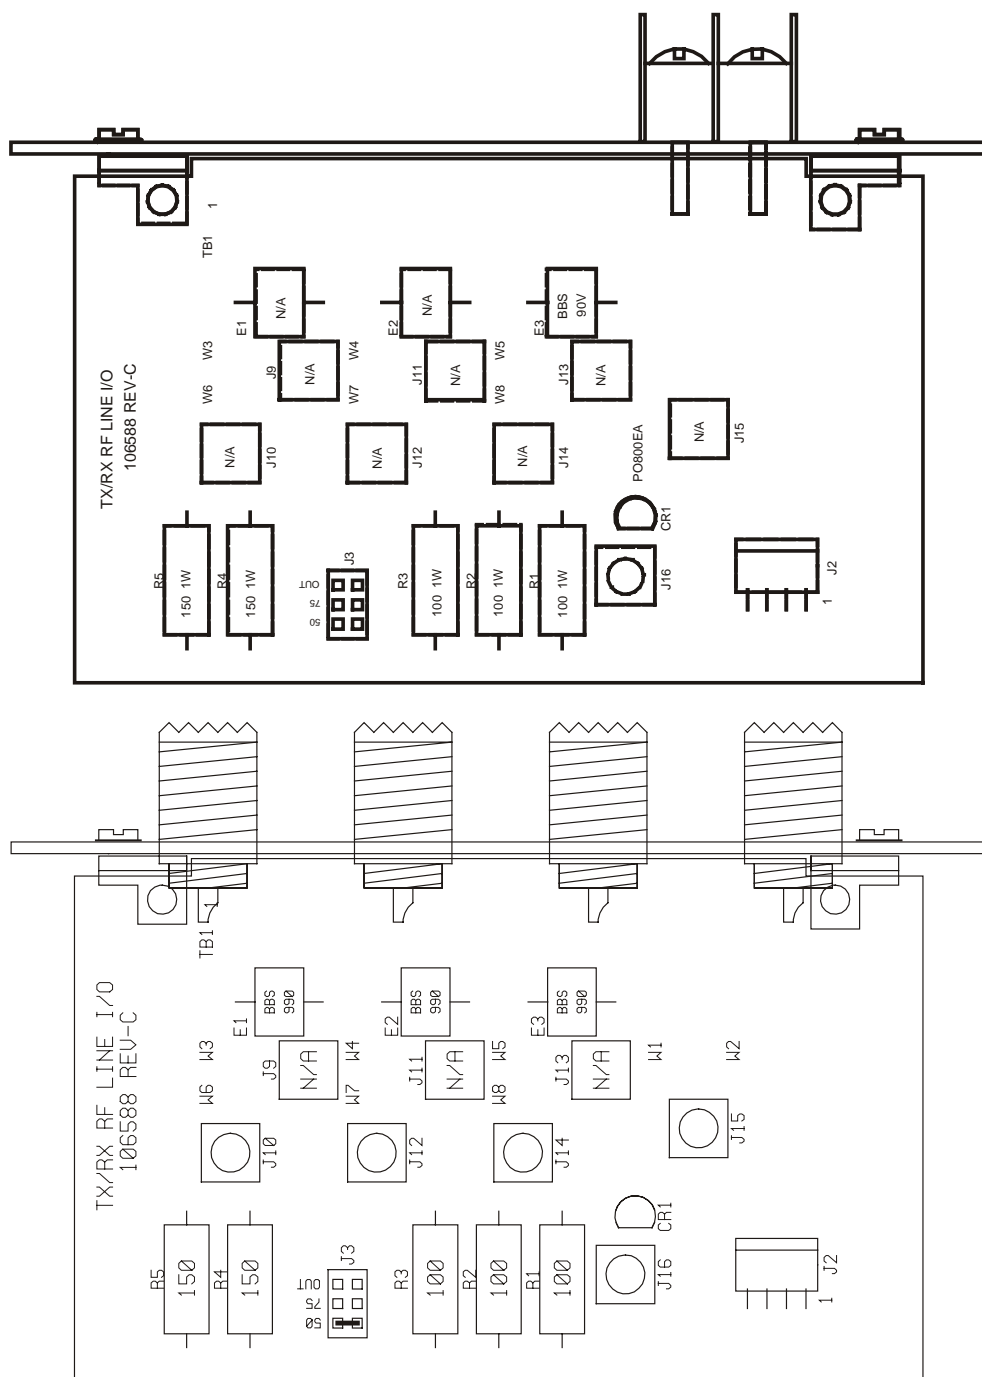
Component locator drawing, TX/RX RF Line I/O module (106585-9)
